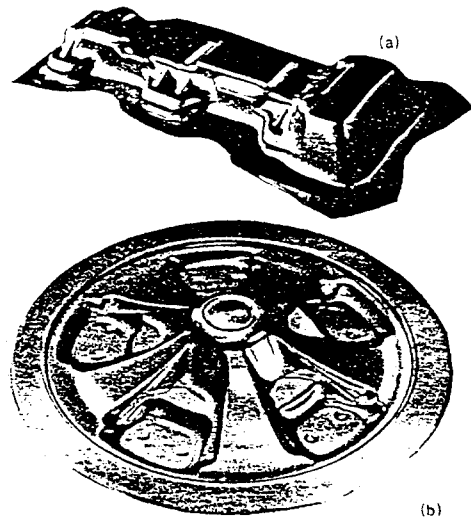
Automobile parts obtained by counter-pressure forming : (a) an engine cover; (b) a wheel cover.
